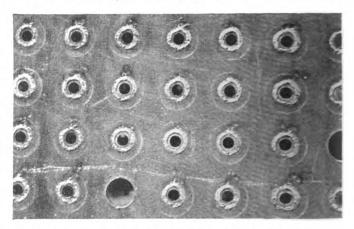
Renewing staybolt holes by welding in tapered bushings, then drilling and tapping threads; 35 holes prepared per hour
